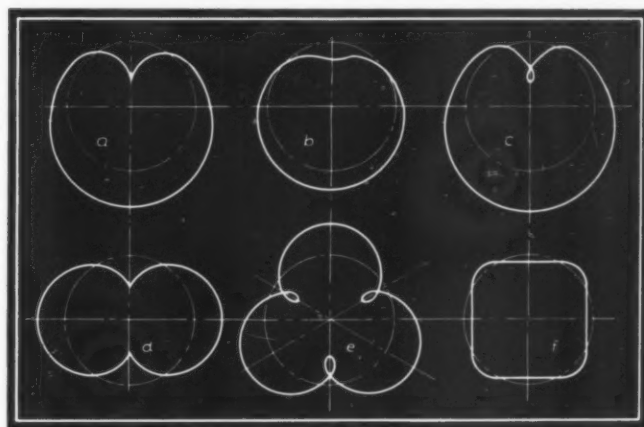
Shapes of path of pin obtainable with arrangement shown in Fig. 2-J
